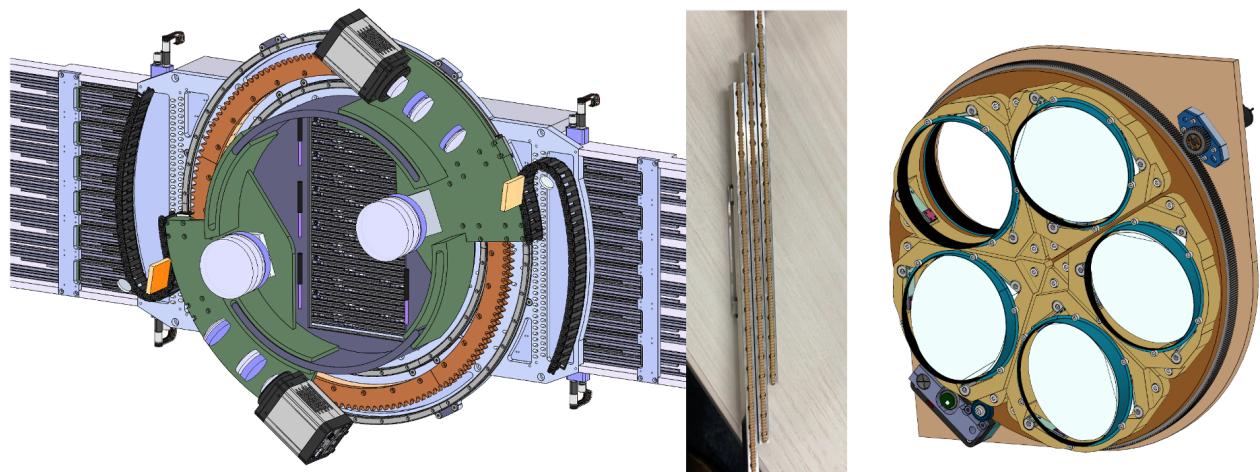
Mechanical configurable slitmask design with the guiding and wavefront sensor optical layouts (left); three bar prototype of the mechanical configurable slitmask (middle) and the grating wheel (right).
